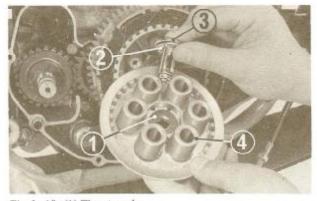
(1) Thrust washer (2) Thrust needle bearing (3) Clutch lifter rod
